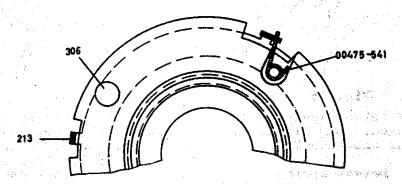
00475-541 Spring 306. Cocking Lever Pivot
